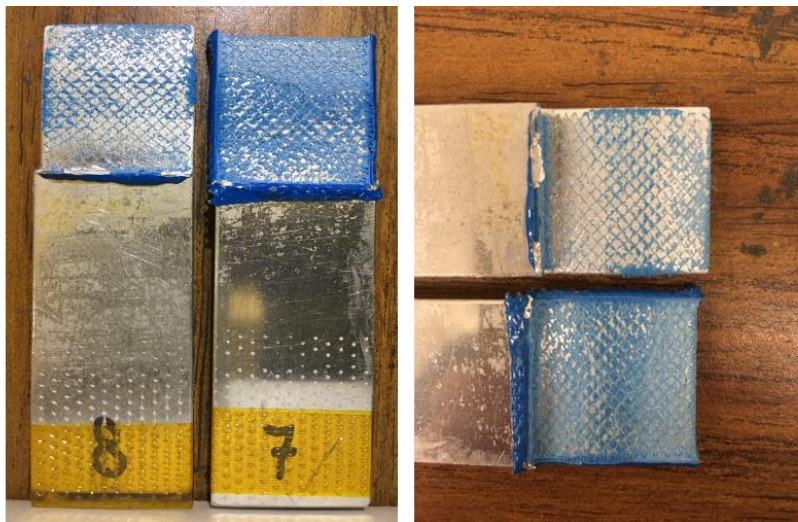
S4-7-8-W-Fracture Surface
